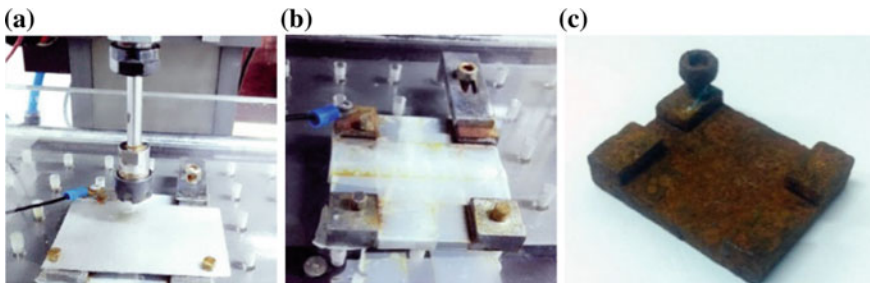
a Tool and ECMM fixture arrangement. b ECMM fixture. c Corroded ECMM fixture after certain period of use
